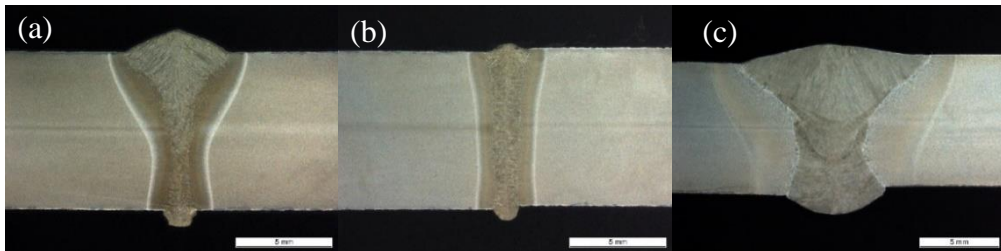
Weld profile for FEM. (a) LHW (LM). (b) EBW (EM). (c) GMAW (MM)
